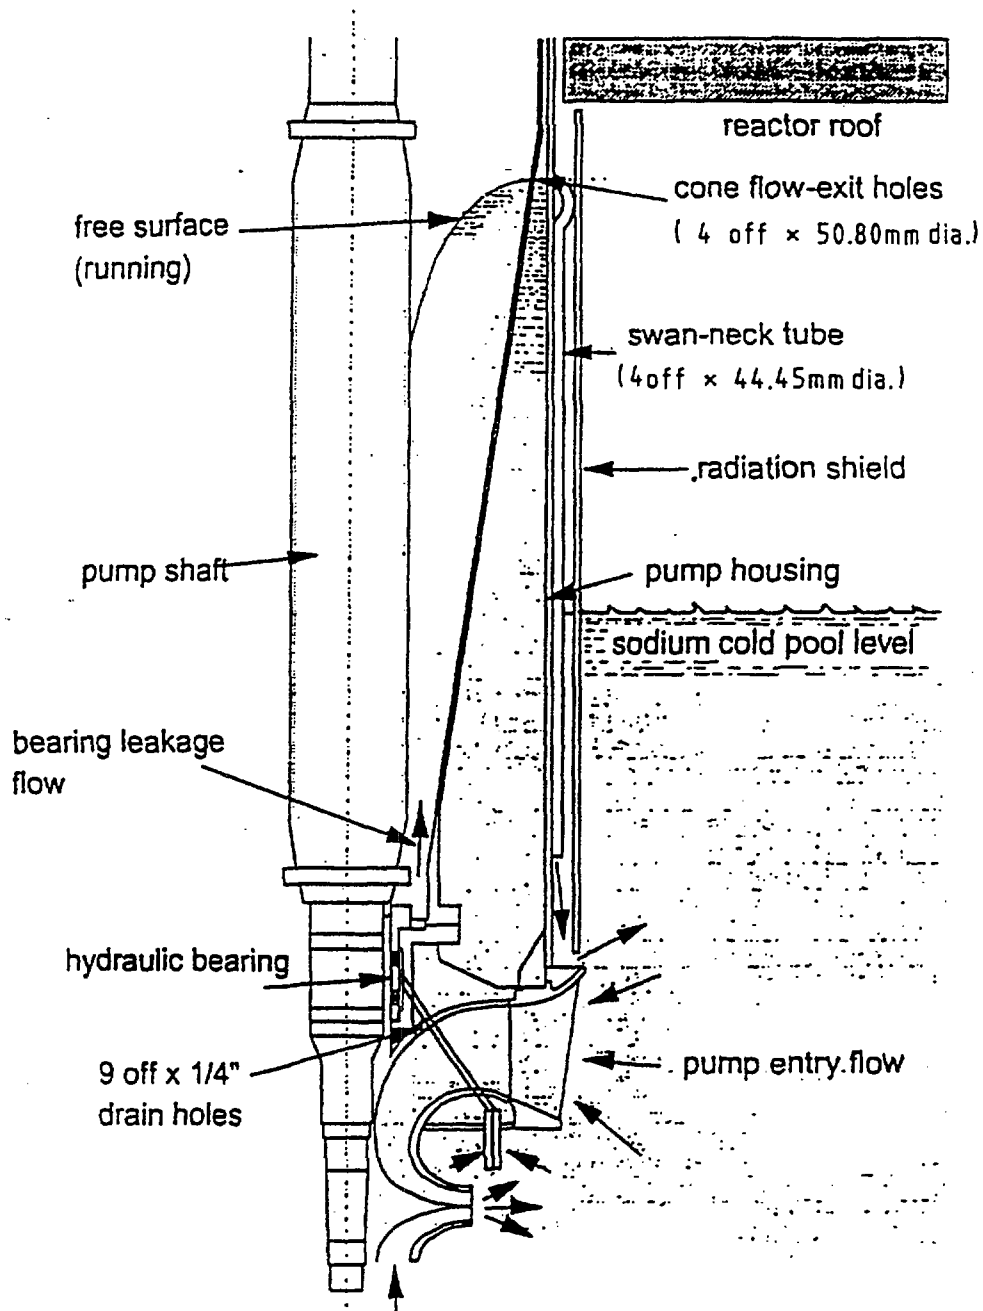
Detail of a PFR Primary Sodium Pump Housing
